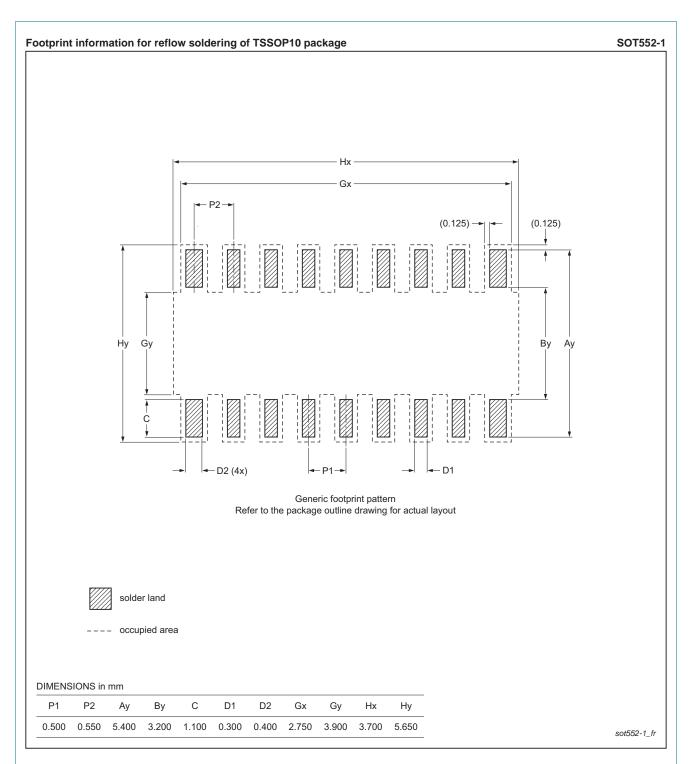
Reflow soldering footprint TSSOP10 (SOT552-1)
